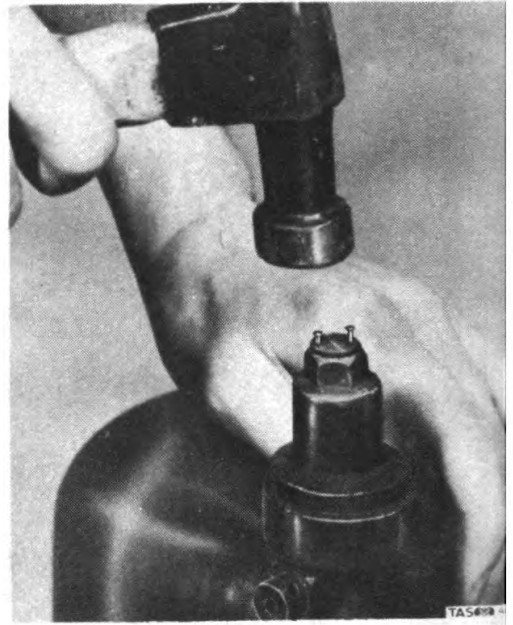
Replacing Adjusting Screw Seal and Two Drive Screws on Pressure Regulator by Light Hammer Taps.
